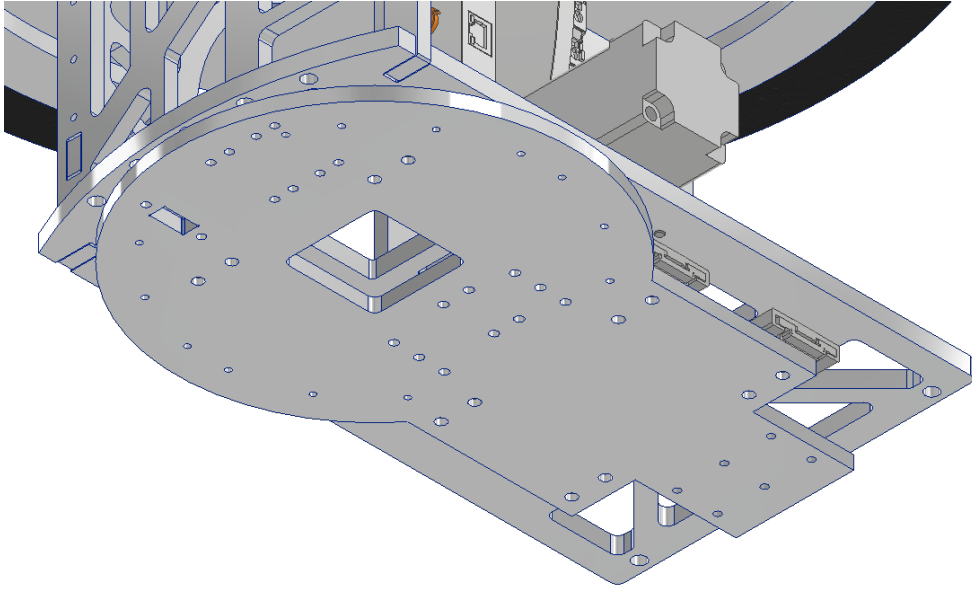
Linear master y-axis with mounting holes for laser optics, wire axis, and accessories.
